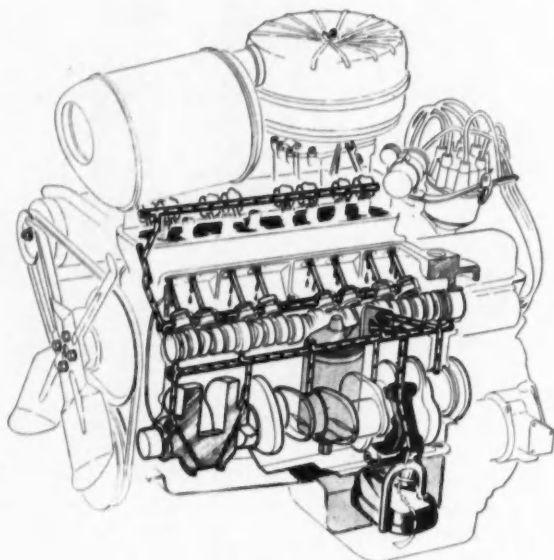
The main oil gallery supplies fresh oil from the full-flow filter to the main, camshaft, and connecting-rod bearings. Two secondary galleries, one on each side of the camshaft, meter oil to the hydraulic valve lifters and valve rocker arms
